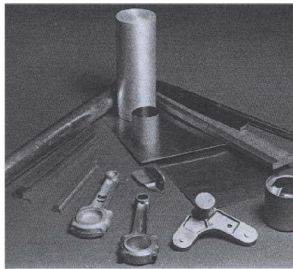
Extrusions, forgings, sheet and a pressure die casting fabricated from DRA (from Willis, T. C., *Metal. & Mater.*, 4, 485, 1988).
